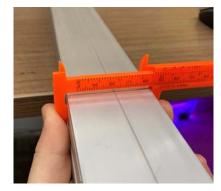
Photo with caliper shown at an angle makes caliper reading difficult and unclear.
